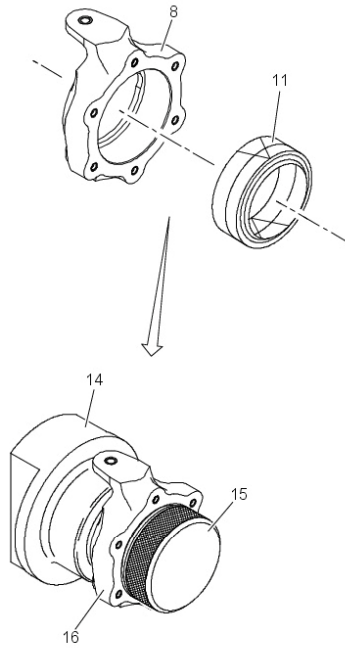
(sheet 4 of 4). Housing and slider group - Disassemble procedure (Sleeve assy P/N 109G6430A03)
